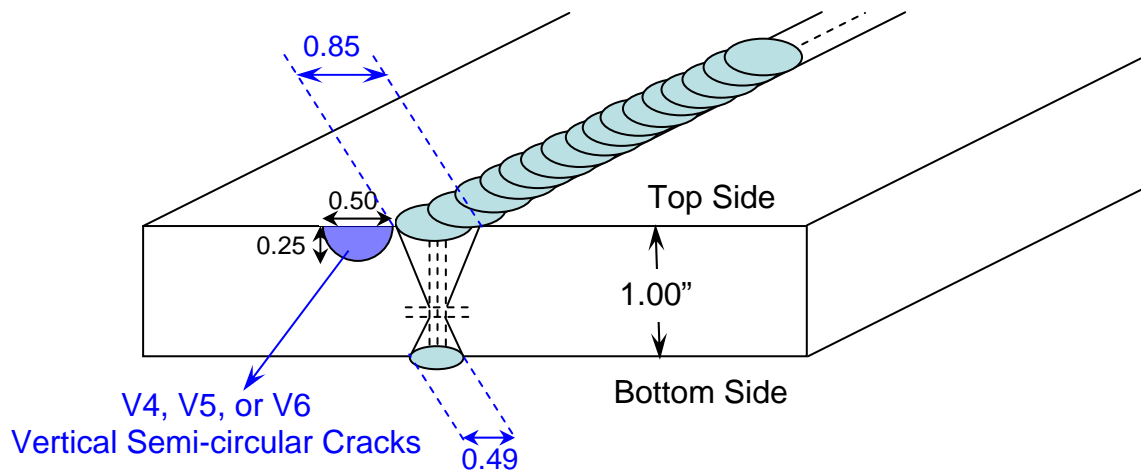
Semi-circular surface cracks perpendicular to the weld (V4, V5, and V6).
